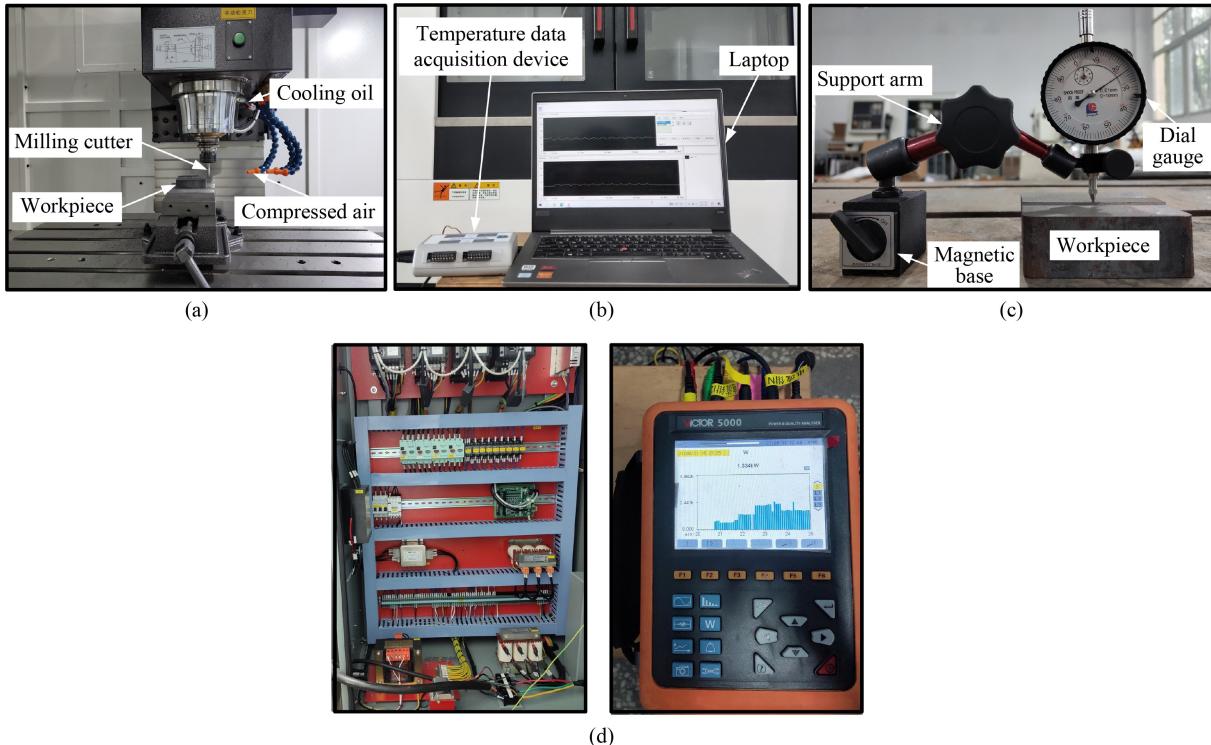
Milling experimental setup: (a) milling cutter and workpiece, (b) temperature data acquisition device and laptop, (c) dial gauge, (d) power bus of the machine tool (left), power and quality analyzer (right).
